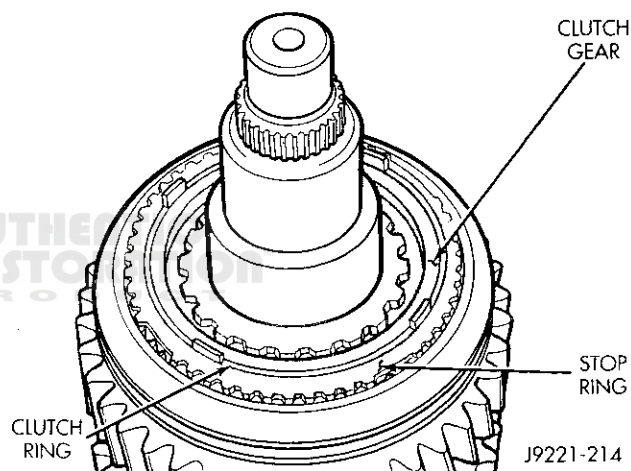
Second Speed Clutch Gear, Clutch Ring And Stop Ring Installation
